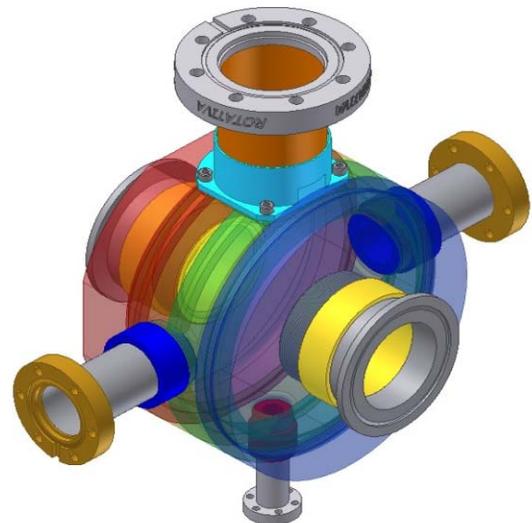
3-D CAD drawing of the prototype third harmonic cavity.
